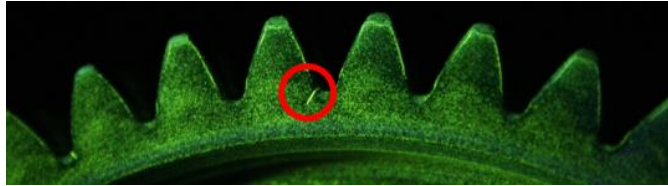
Gear wheel subjected to magnetic flaw detection in UV light
